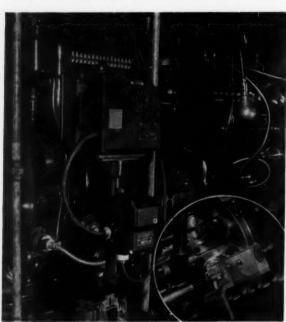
Movement of drill head up and down actuates counter built on front of machine
